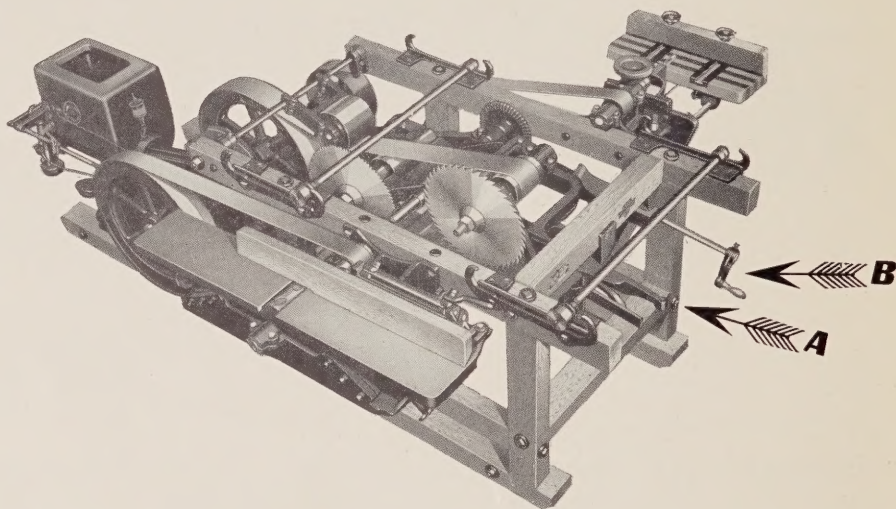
Showing internal mechanism of the BEACH Double Arbor arrangement.
